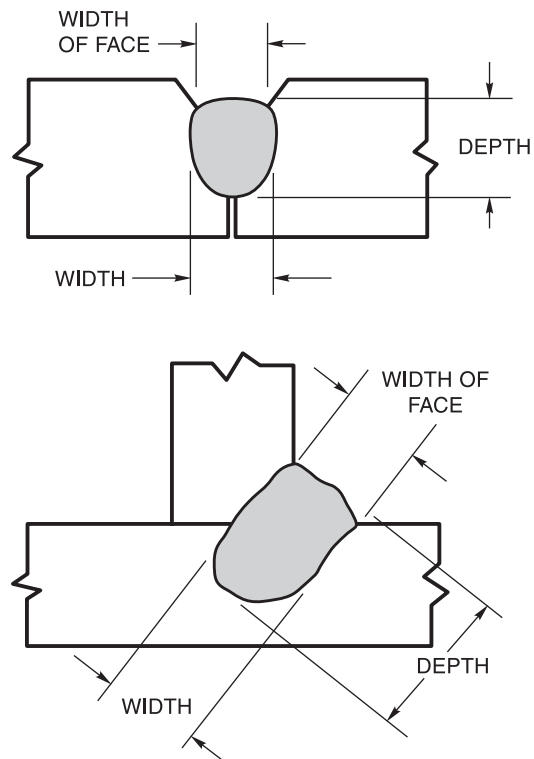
Unacceptable Submerged Arc Weld Pass where the Depth and Width Exceed the Face Width
